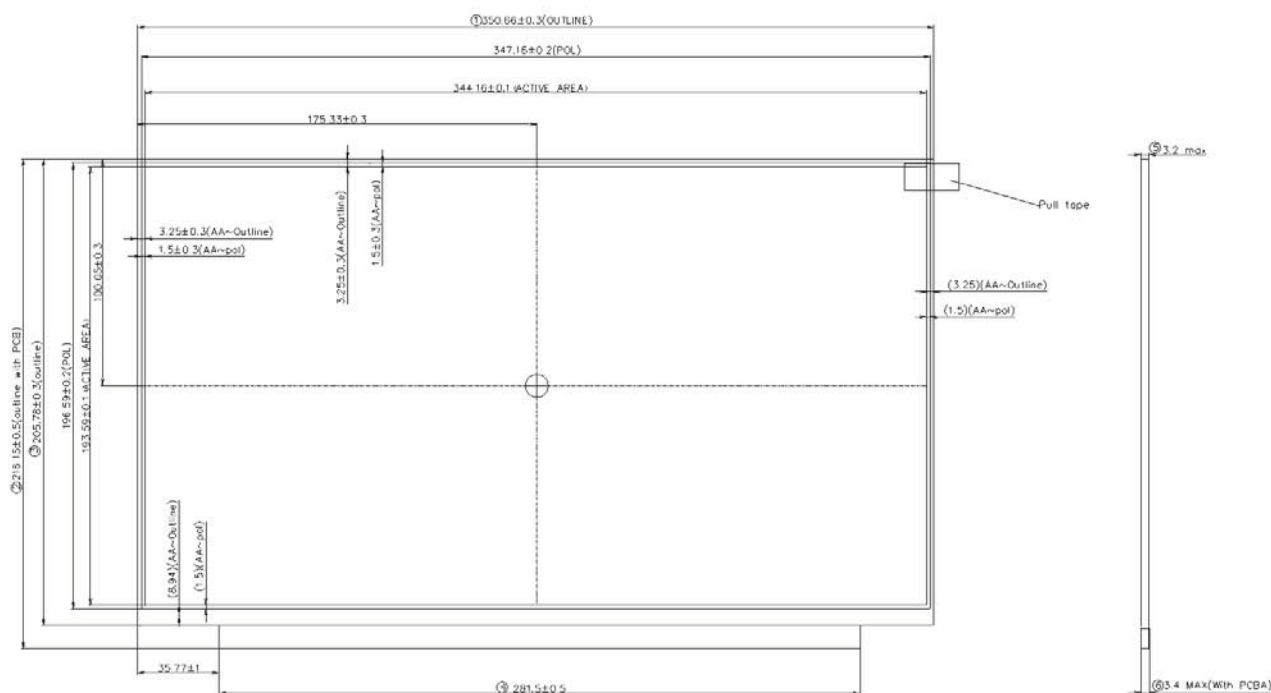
TFT-LCD Module Outline Dimension (Front View)
